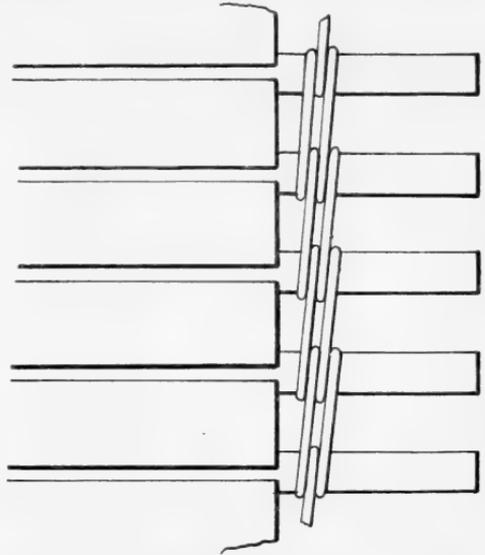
Drawing showing section of Winding of Rotor in Fig. 109.
